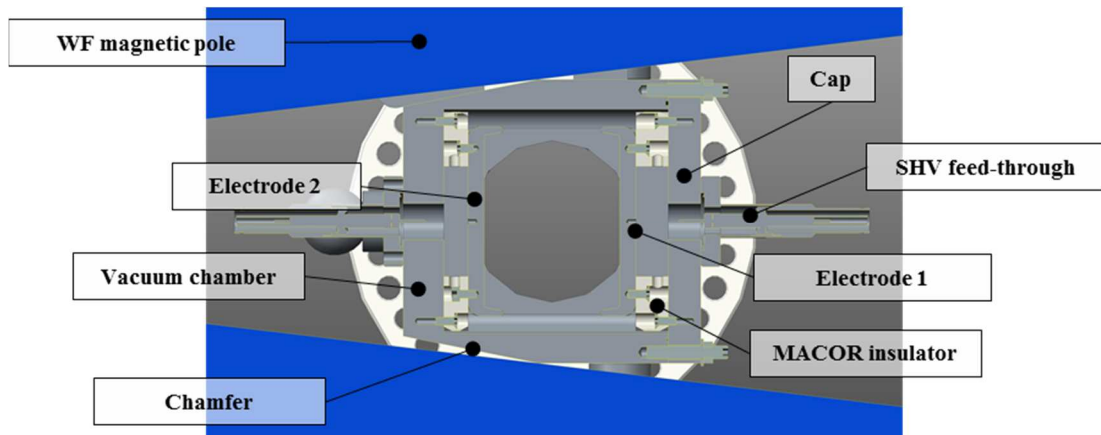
CAD section on the x-y plane of the final assembly.
